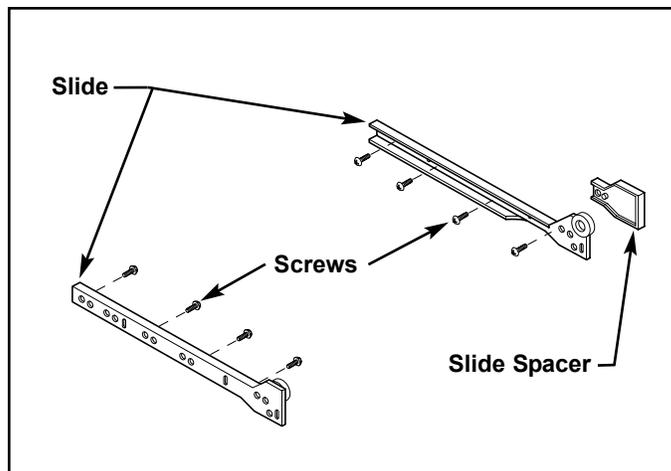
Wine Compartment Cabinet Slide & Slide Spacer
